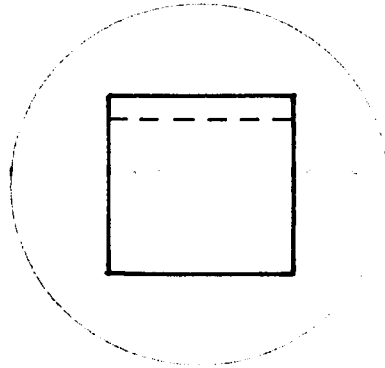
CROSS-SECTION OF STEEL BAR SHOWING METHOD OF CUTTING AND NOTCHING SPECIMENS.
